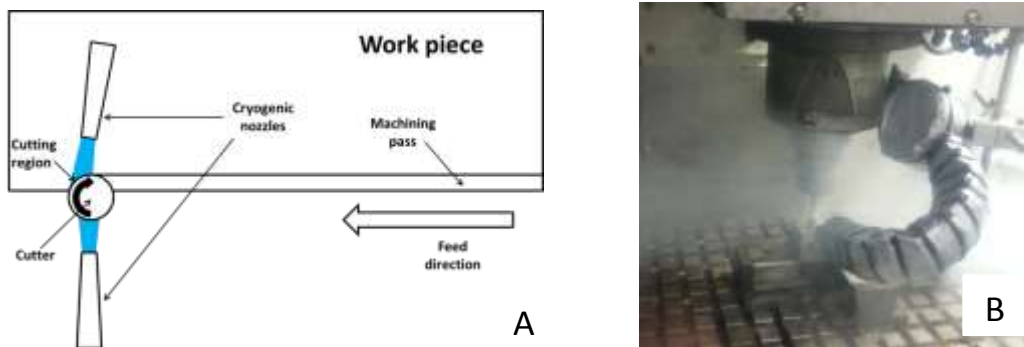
Cryogenic machining with dual-nozzle system. A) Schematic top view showing cryogenic cooling strategy, B) During machining
